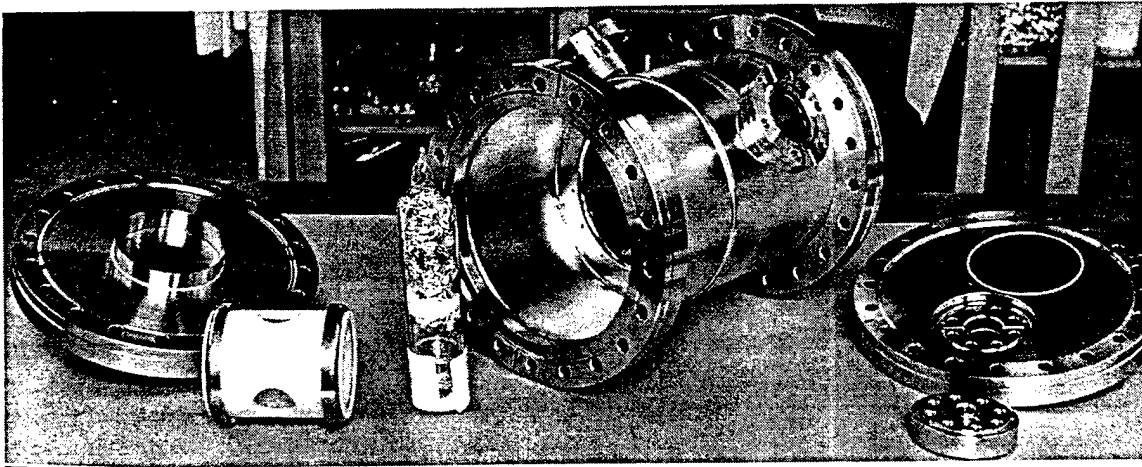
Components for millimeter wave gun and vacuum chamber. The machining for the inverted vacuum flange can be seen on the 8" diameter base plate on the right of the photograph
